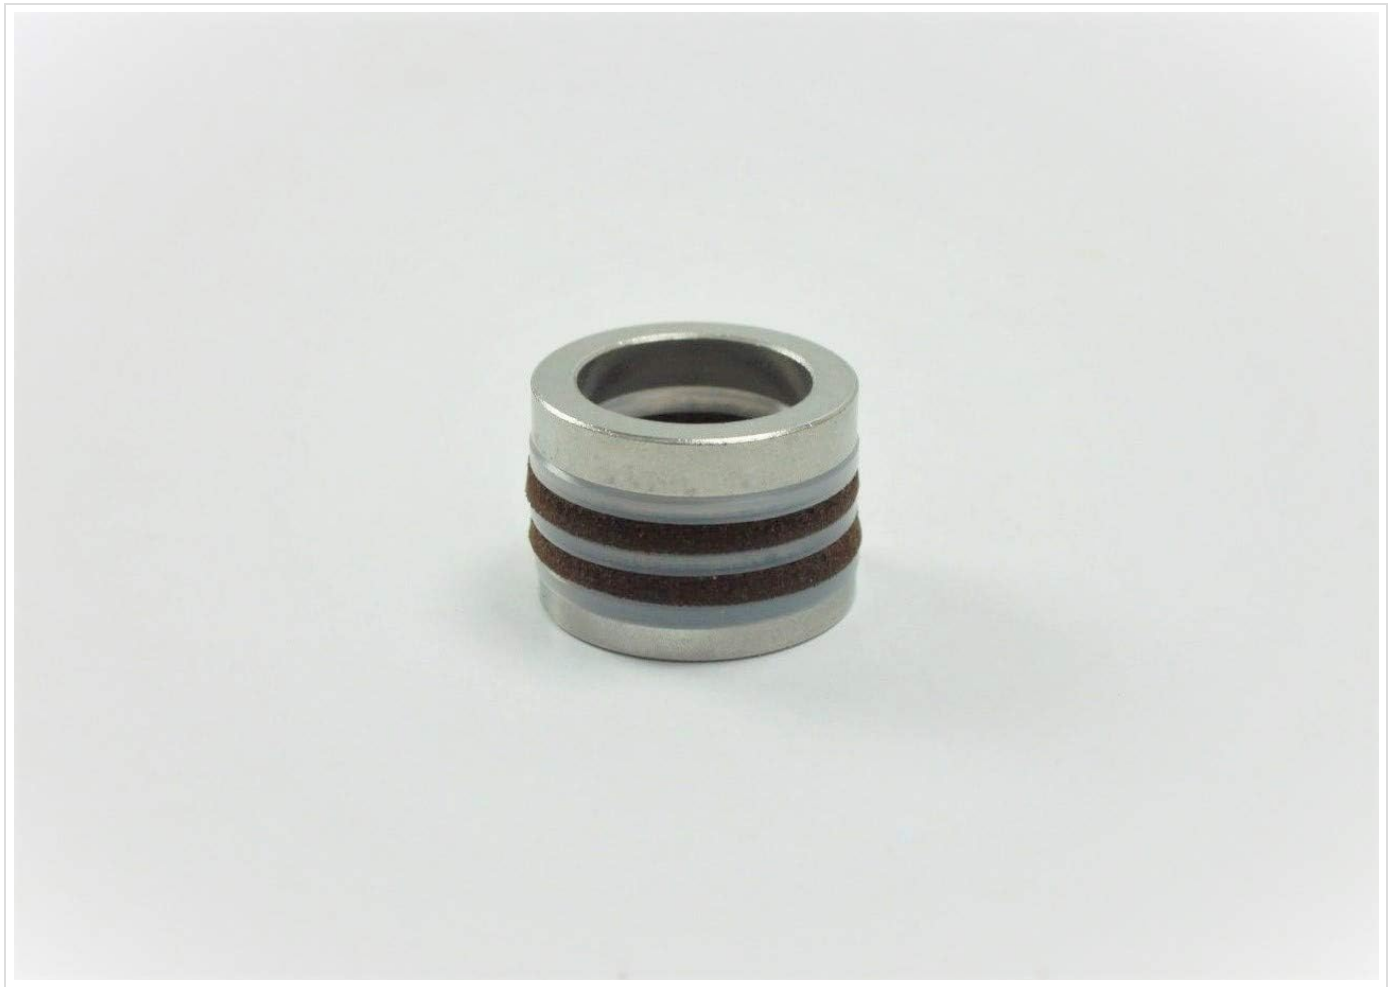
Assembled view of the packing set. This image shows the packing set components stacked in their typical assembly order, ready for installation into the pump.
